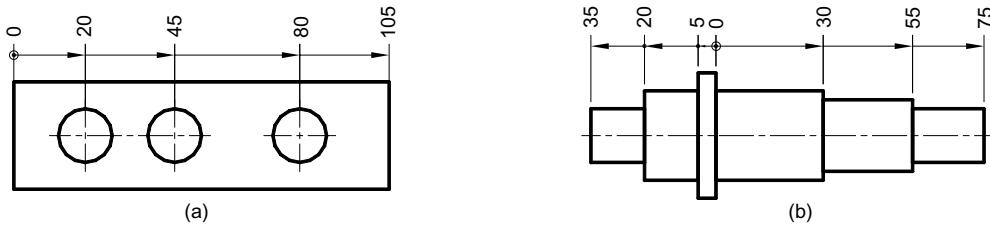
(a) and (b) Superimposed running dimensioning
